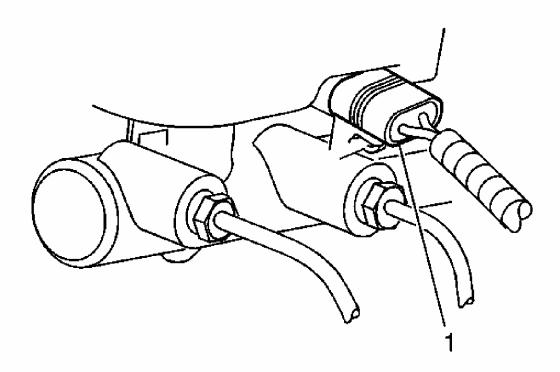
View Of Brake Fluid Level Sensor Electrical Connector Courtesy of GENERAL MOTORS CORP.
